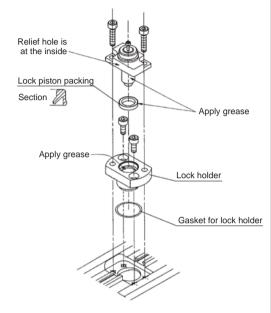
Reassembling of end lock part (Ø32, Ø40)
